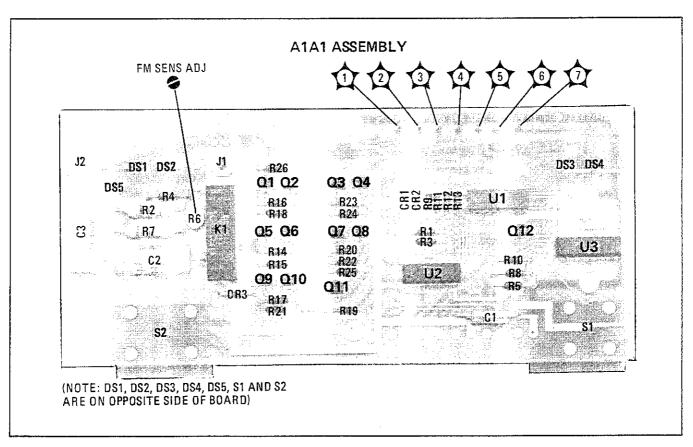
A1A1 Front Panel Assembly Component, Adjustment, and Test Point Locations
